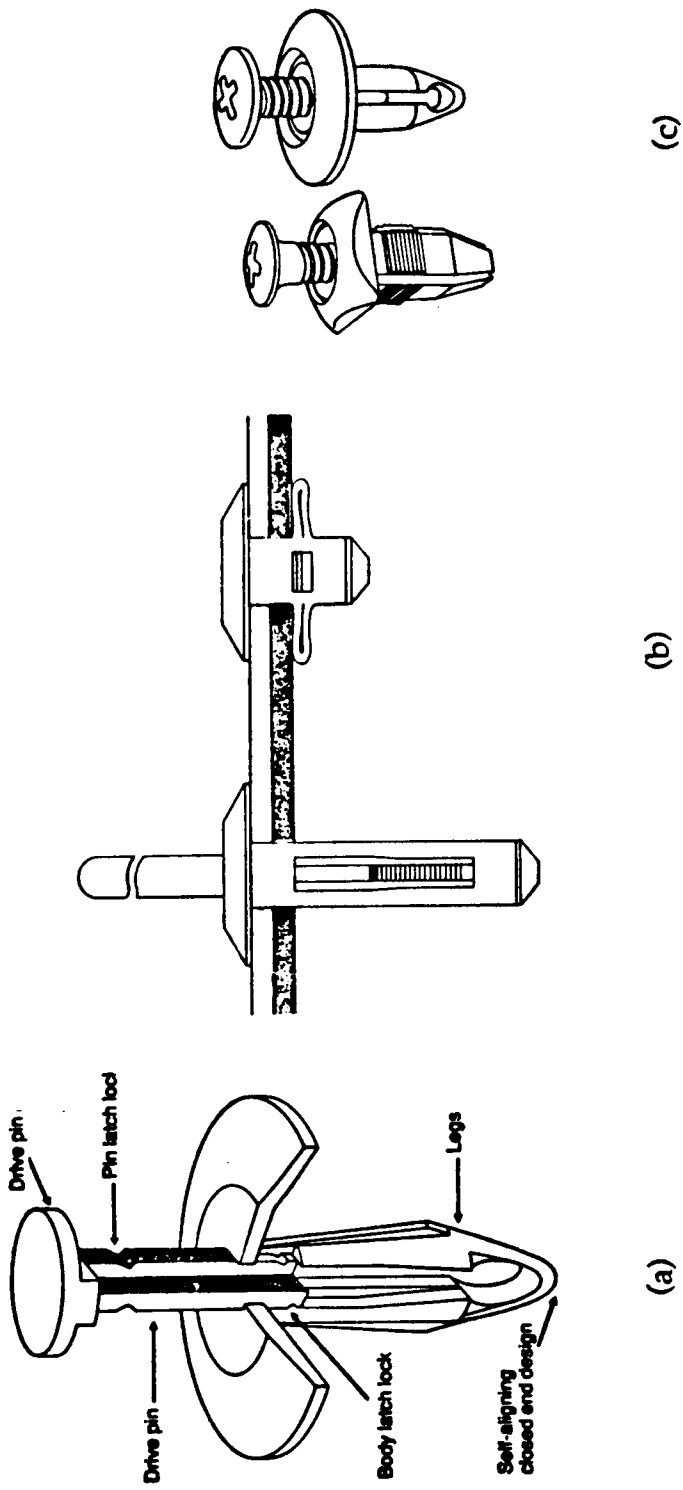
Special plastic blind rivets. a) Push rivets. b) Expansion plastic rivet. c) Screw rivet.
